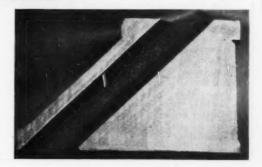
(above)—Sectioned gear casting had high machine shop losses due to shrinkage caused by improper feeding through small gates and runner. Fig. 12 (left)—Small sprues, gates, and runner which produced defective casting (Fig. 10) are shown at left of photo. Properly proportioned sprue, gate, and riser system which produced sound casting (Fig. 11) are at right. Fig. 11 (below)—Revision of the gating system eliminated shrinkage defects.
